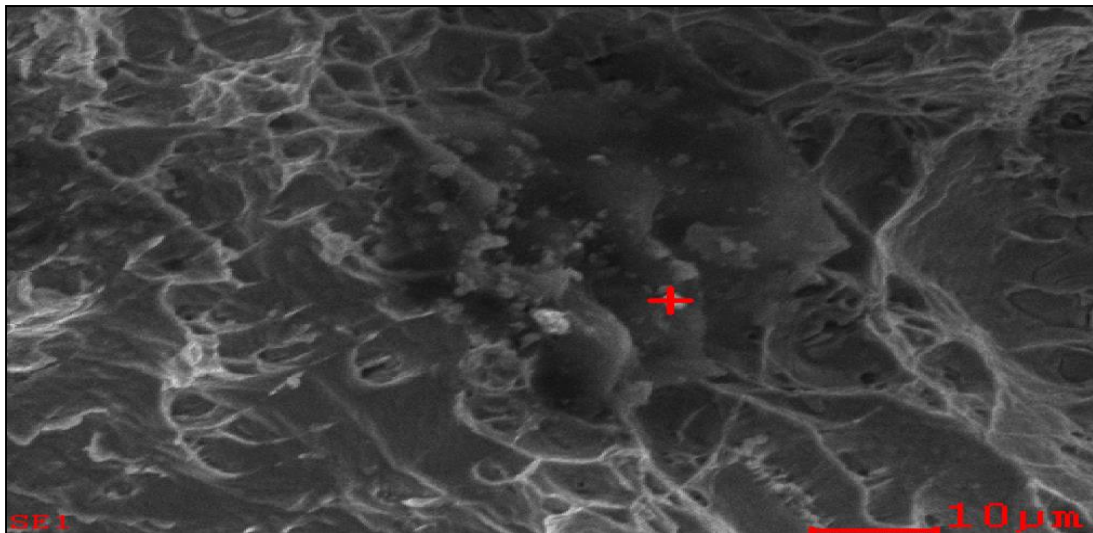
Fractography for SS347 sample SS-HTBA-A-2, heat-treated at 950 °C before and after ablation, showing dimples at final fracture region.
